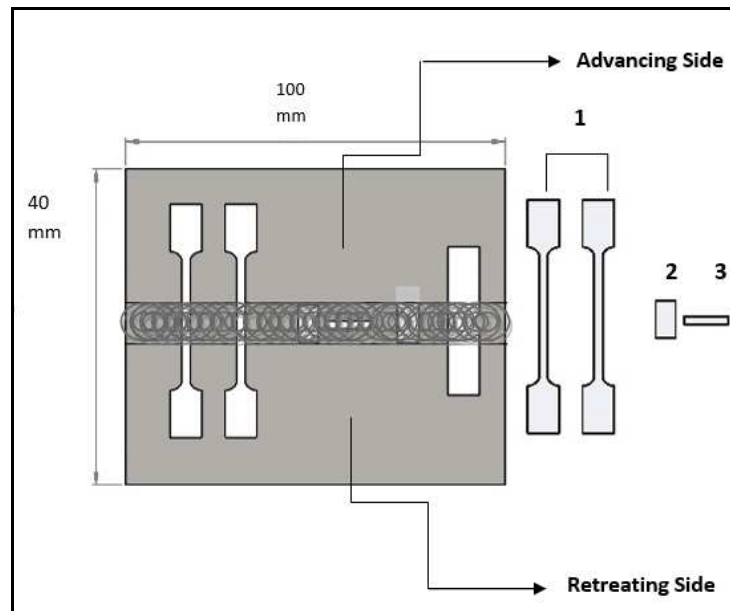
Machining of Samples for Mechanical Testing and Metallographic Analysis
